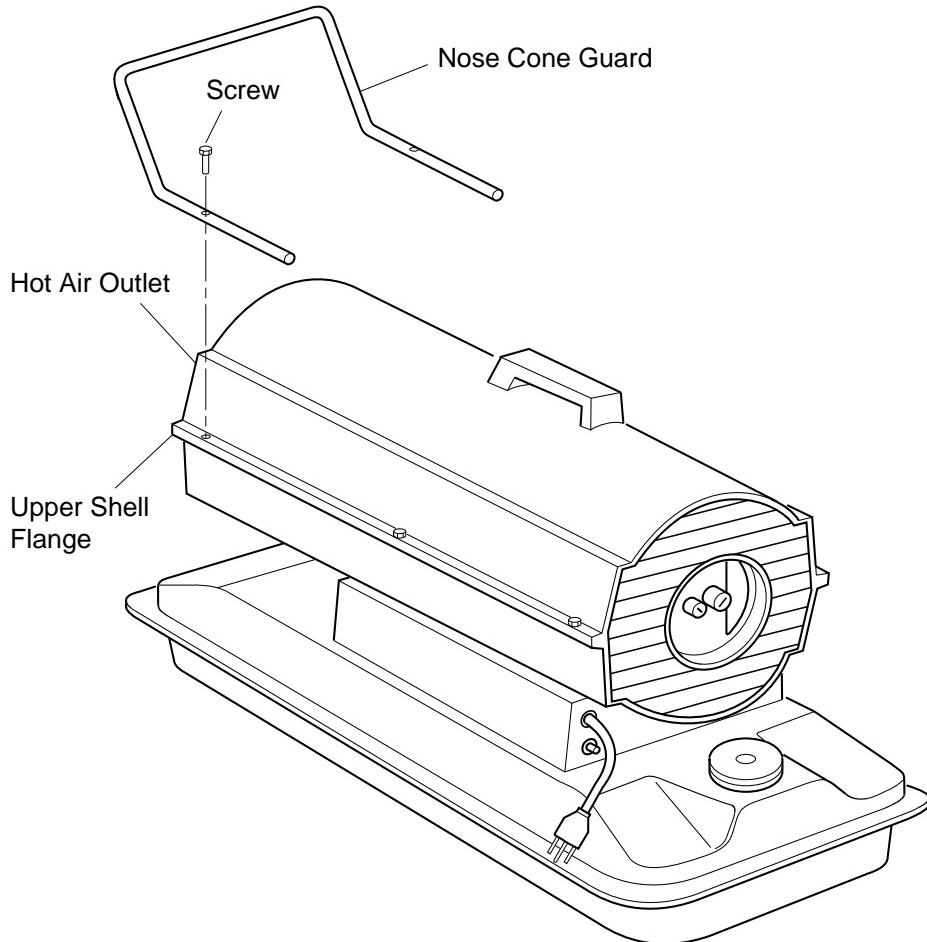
Nose Cone Guard Assembly, 35 Model Only
